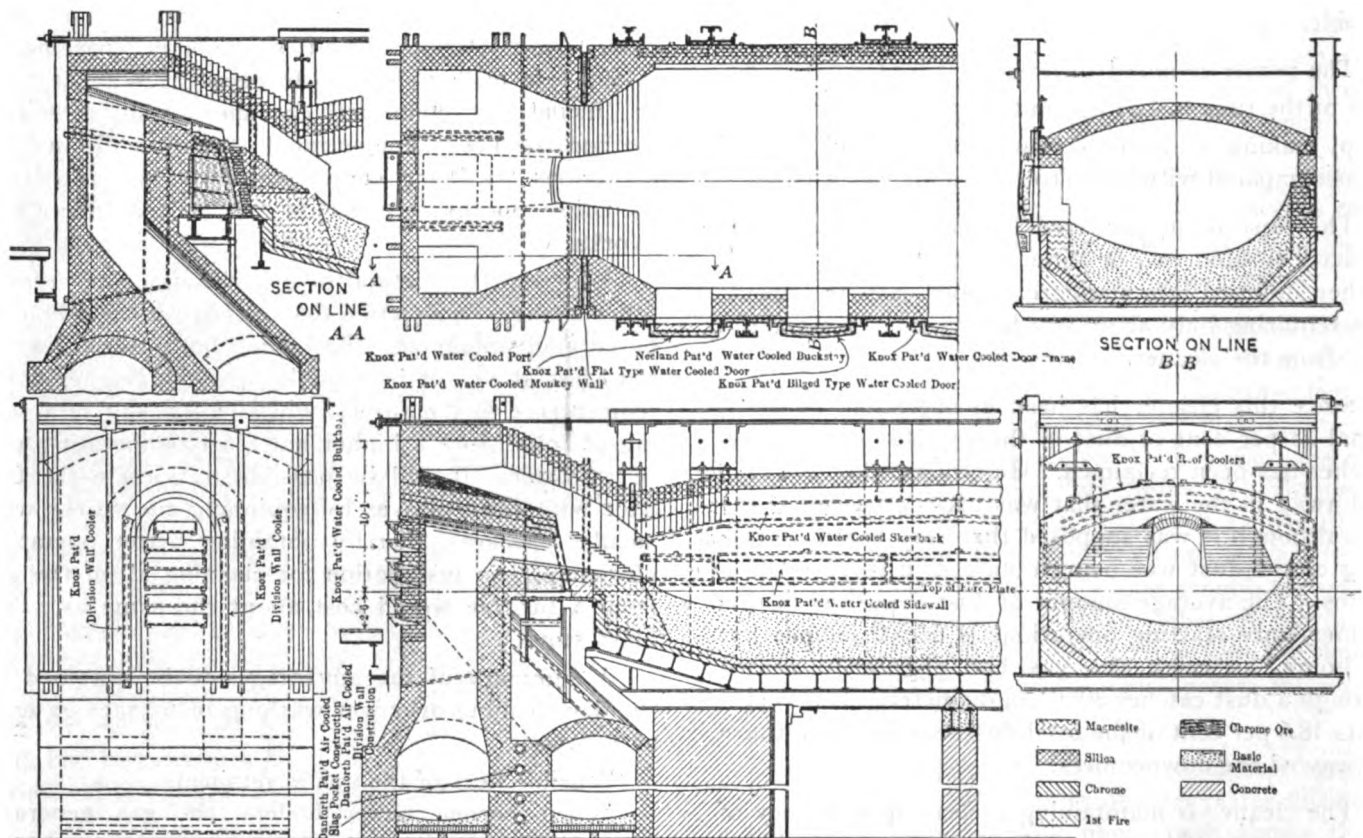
Open hearth steel furnace equipped with water cooled devices.
